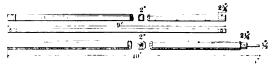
RIDGE AND POLE FOR WALL TENT.
